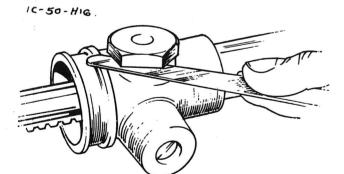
MEASURING CAP NUT HEAD/ PINION HOUSING CLEARANCE
